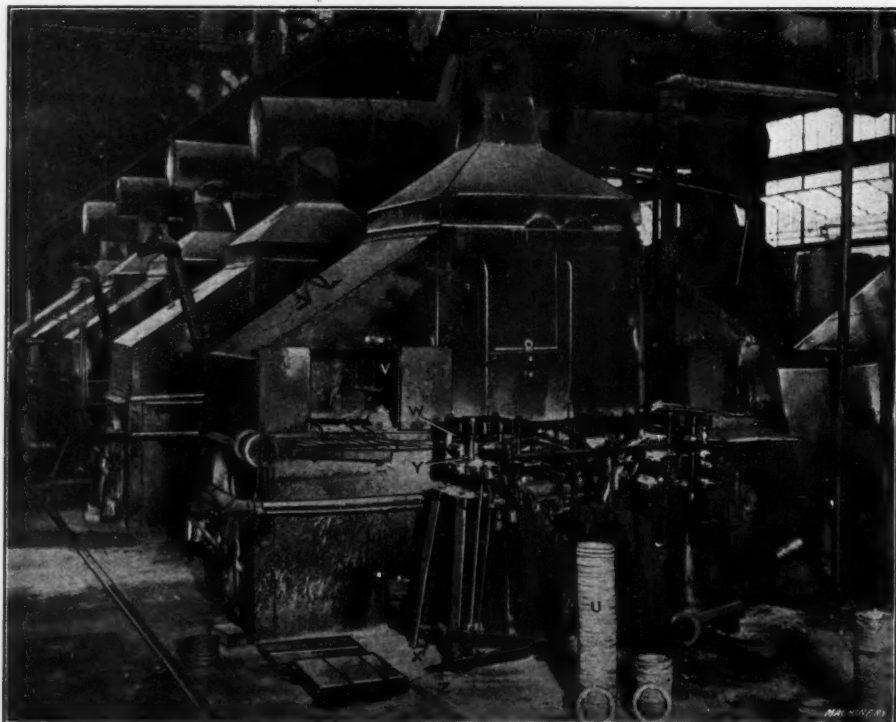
Battery of Cyanide Furnaces—Special Quenching Machines for Clutch Rings in Foreground
